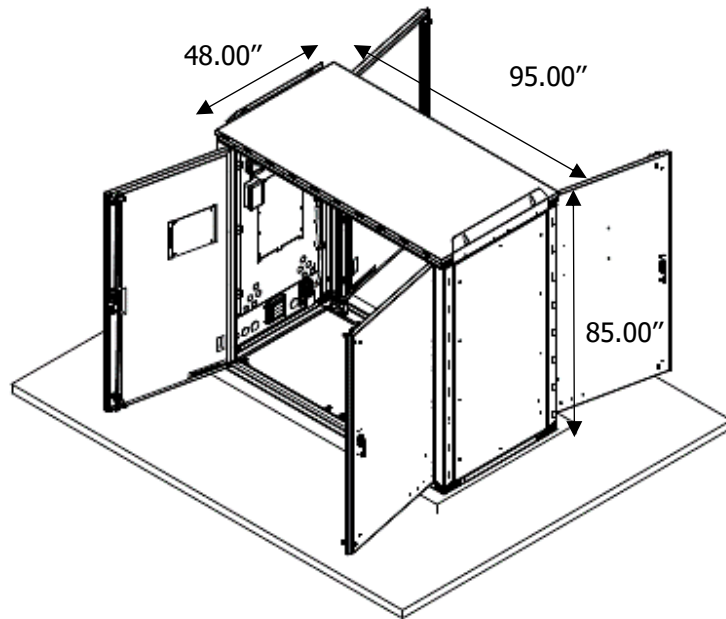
Drawing of the general appearance of the one-bay enclosure.
